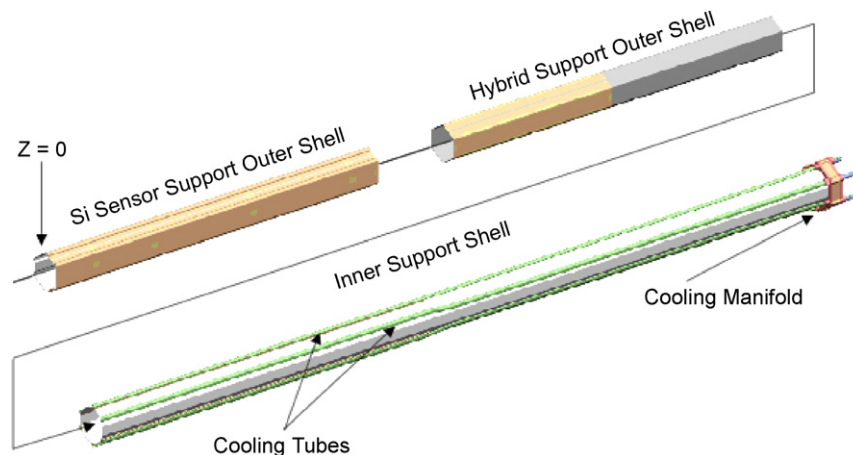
Drawing of the L0 detector showing the sensor mounting shell, the hybrid mounting shell and the inner support shell.
